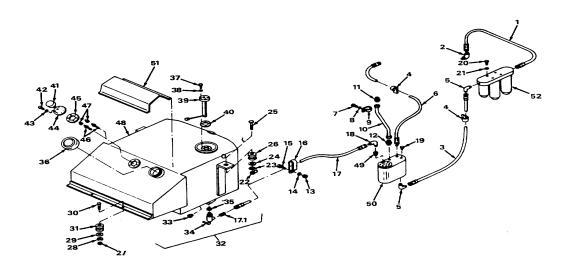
Carrier fuel tanks, lines, and fittings, disassembly and reassembly (Model 2)
